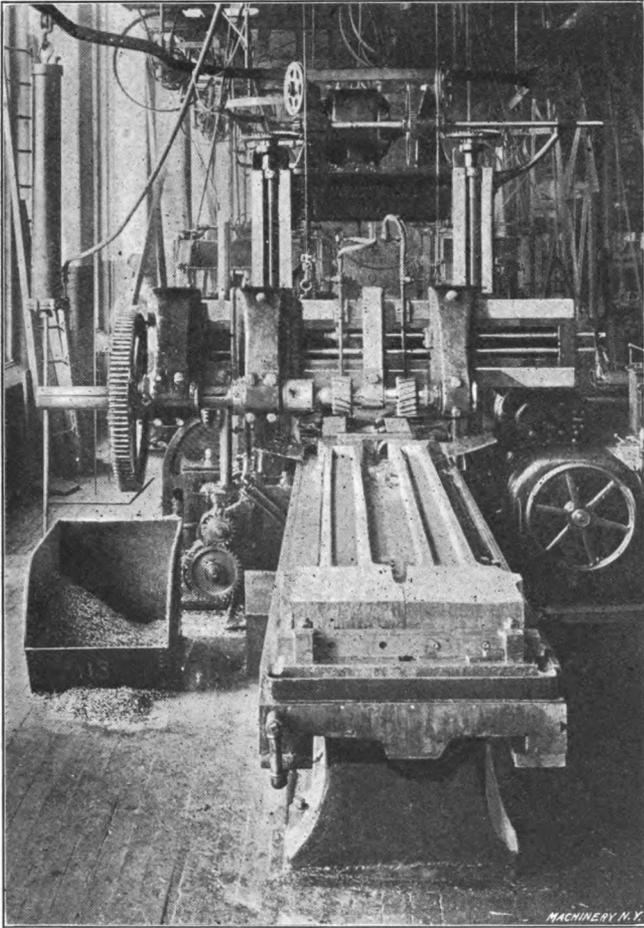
Channeling Operation performed with Inserted Tooth Cutter
